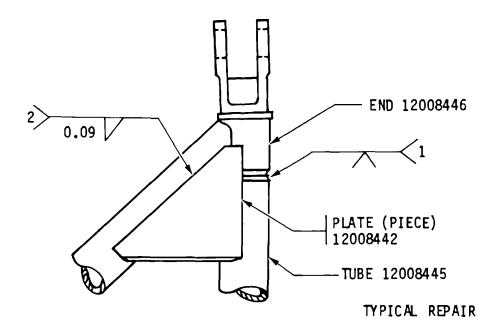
Repair welding procedure for tube 12008445 to plate 12008442.
